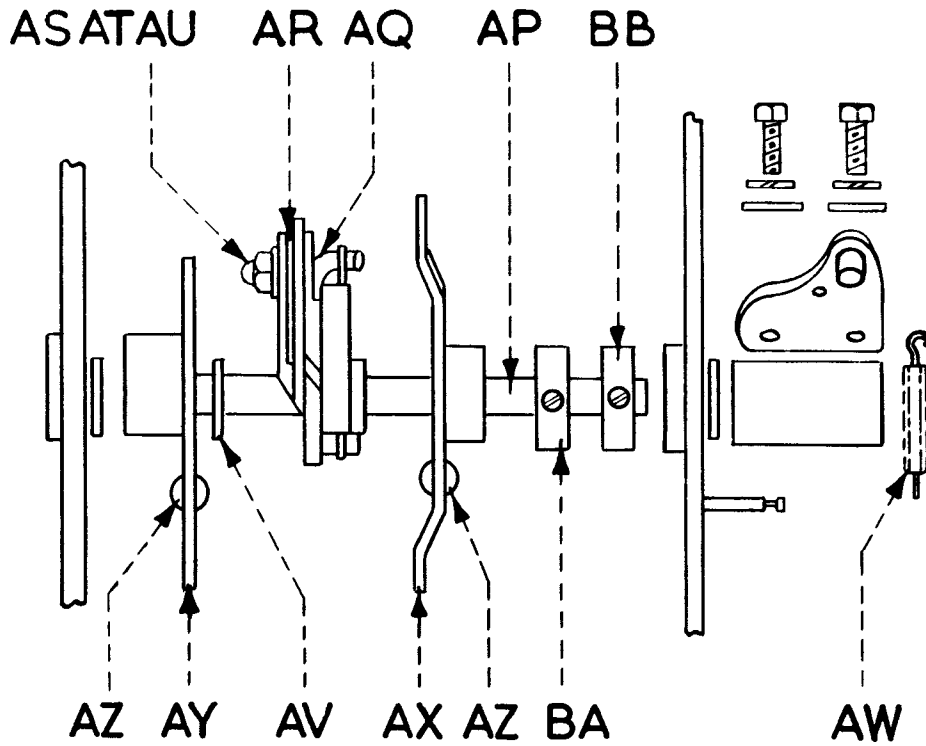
DETENT CONTROL SHAFT (EXPLODED VIEW)
